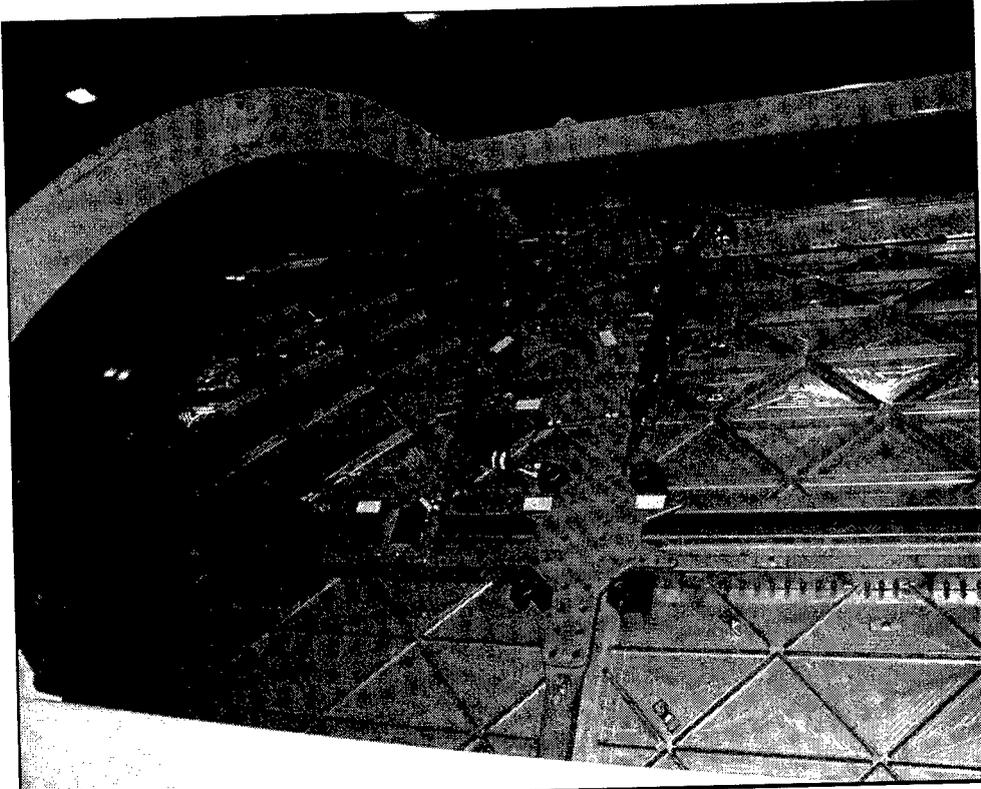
MPLM GRAPPLE FIXTURE MOUNTING LOCATION.
